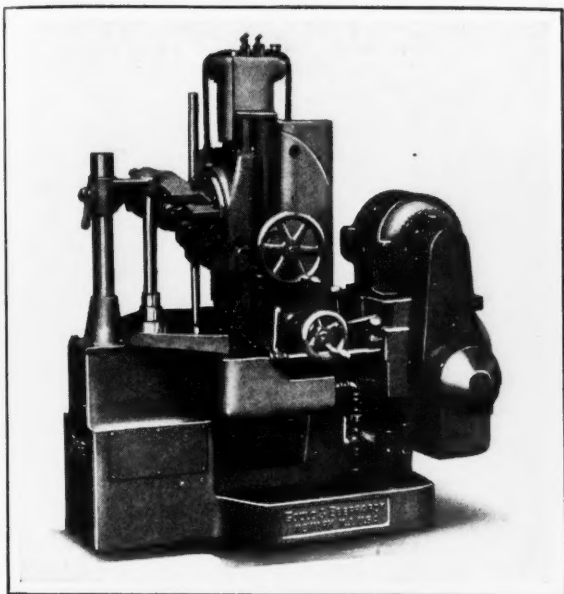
Gould & Eberhardt Manufacturing-type Gear-hobbing Machine for Small Fine-pitch Gears
